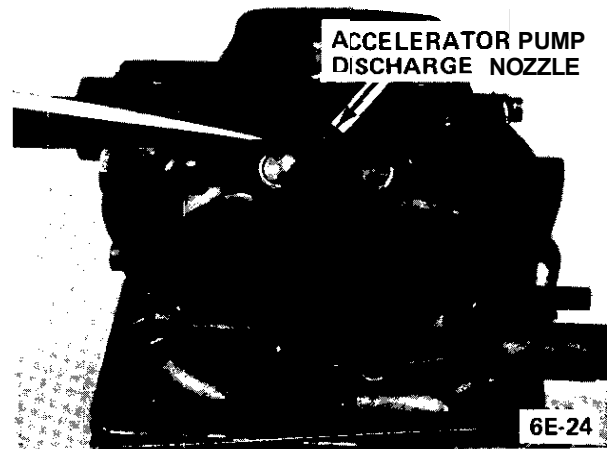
E-24 Removing Accelerator Pump Discharge Nozzle
